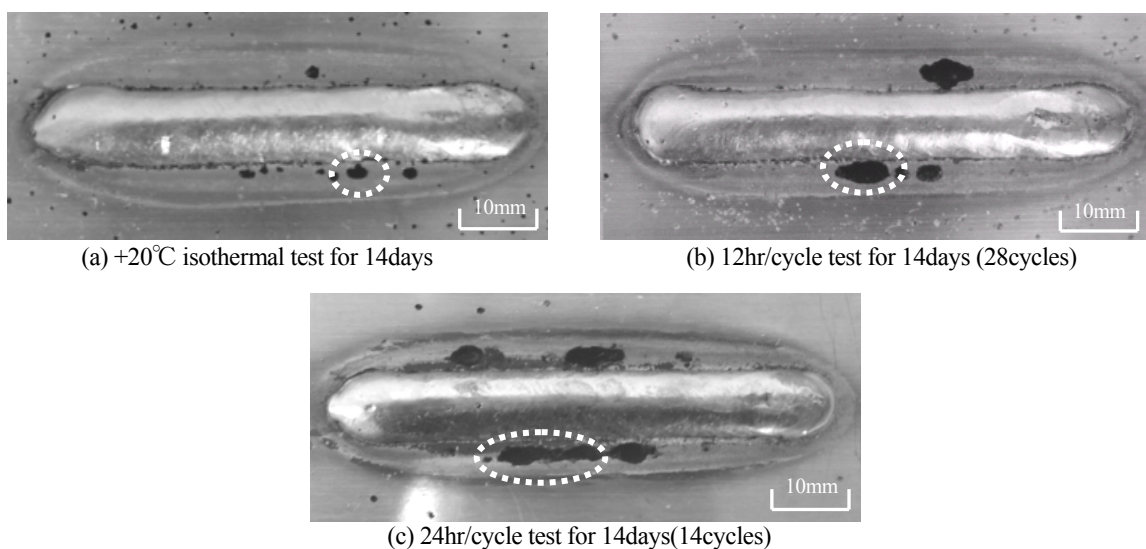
Occurrence of pitting corrosion of MIG welding specimen in 6% FeCl₃ solution for 14 days
